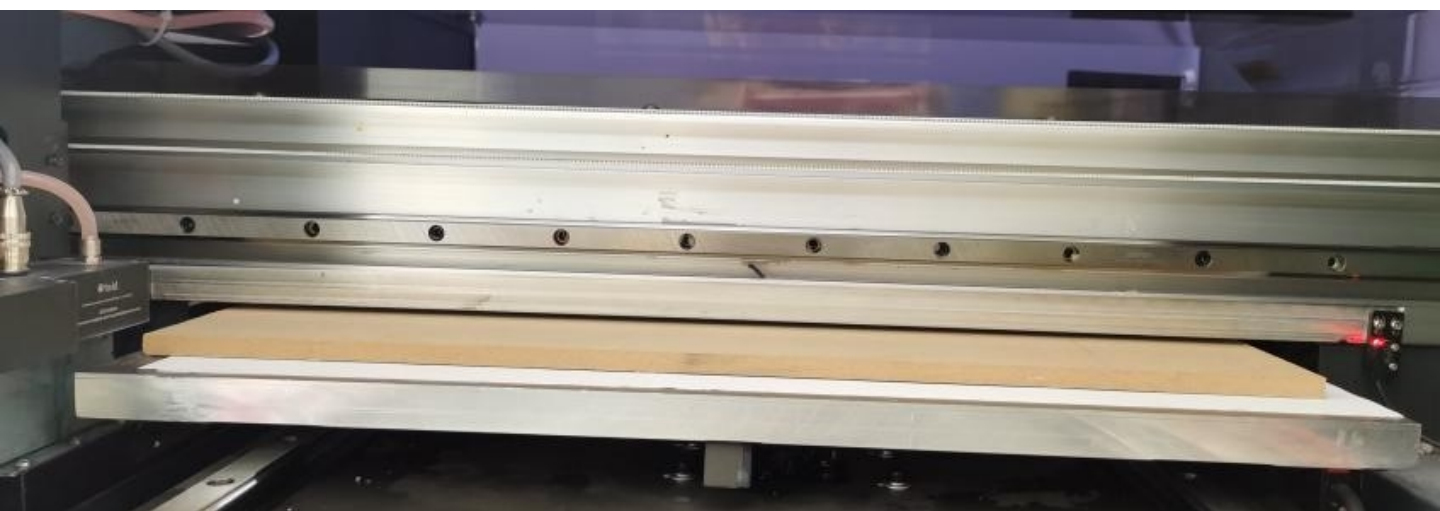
auto-detecting the sample and auto adjusting the printing height
